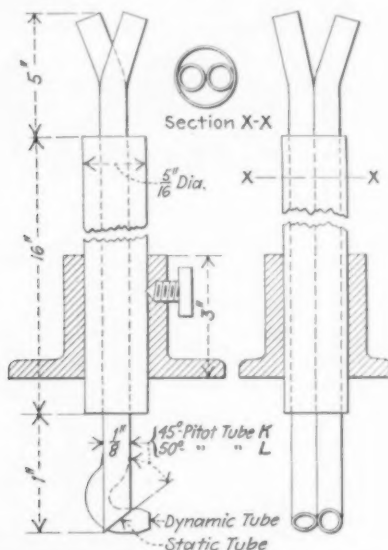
DIMENSIONED SKETCH OF PITOT TUBES K AND L
